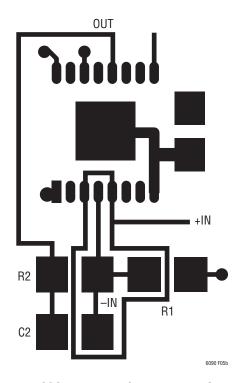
TSSOP Package PCB Layout with Guard Ring
